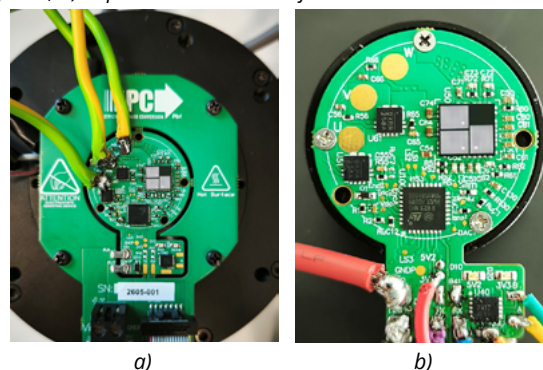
a) EPC91132 with outer PCB ring mounted in a humanoid joint motor; b) EPC91132 mounted in a drone motor
